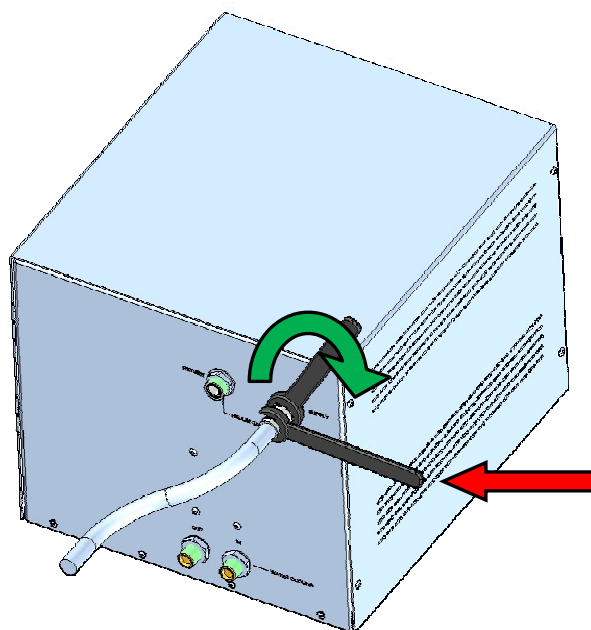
Connection of a helium hose to the Cryodrive using two spanners
